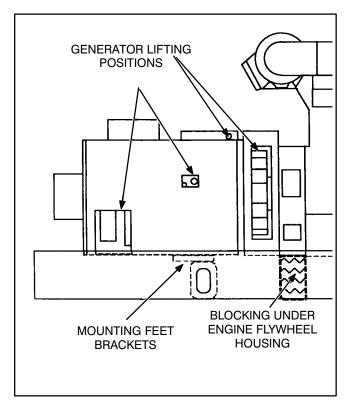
GENERATOR LIFTING POSITIONS
